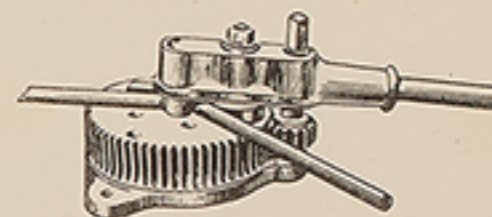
Kennedy Bar Bending Machine, Geared Pattern
